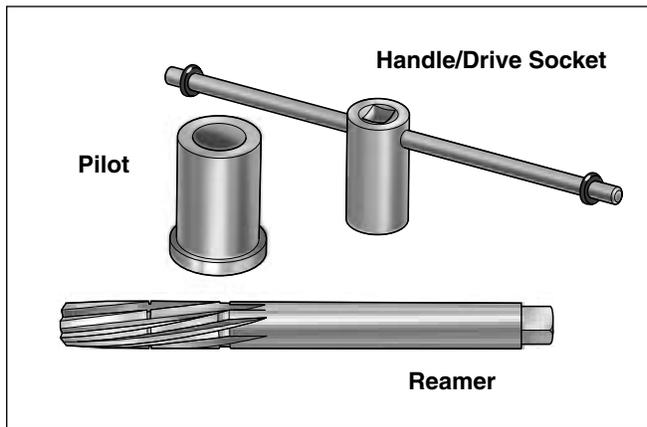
Crankshaft Bushing Reamer (Part No. HD-42316) and Handle/Drive Socket (Part No. HD-43645)
